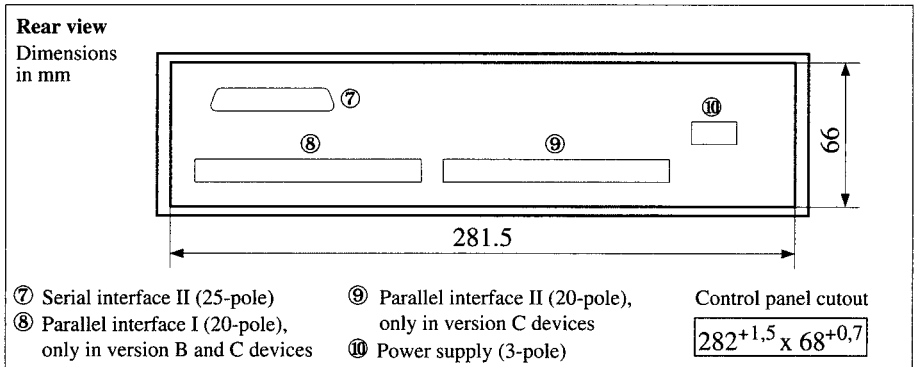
DAA 288-120/240 mounting dimensions, rear view
